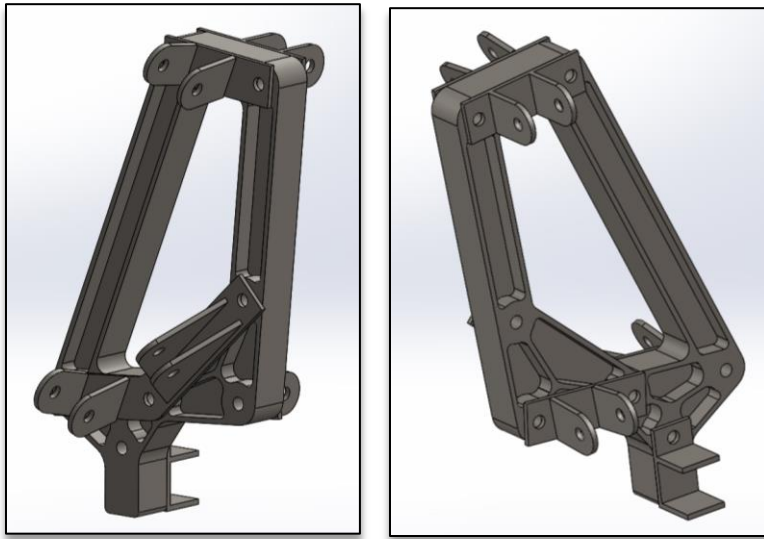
Front Machined Plate, Front View (Left) and Rear View (Right)
